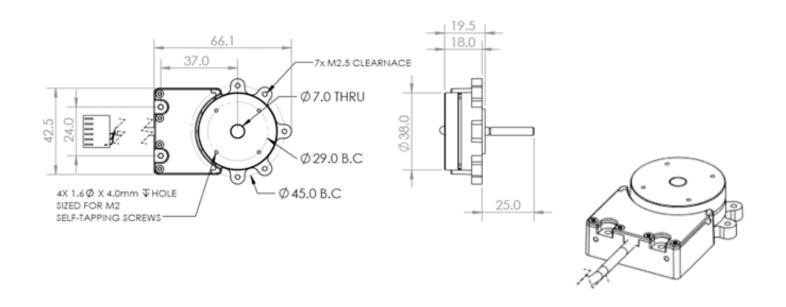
Mechanical drawing (mm) of RBS Solid Shaft Rotary Motor without Encoder
